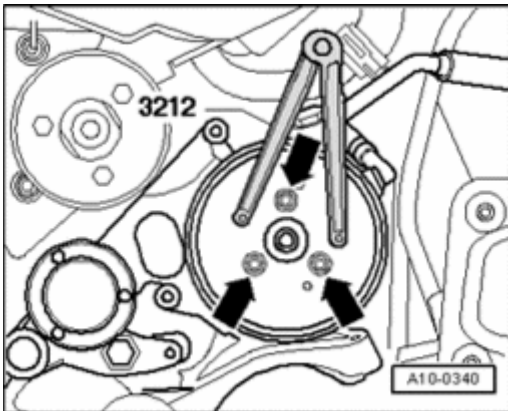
Removing/Installing Belt Pulley For Power Steering Pump
